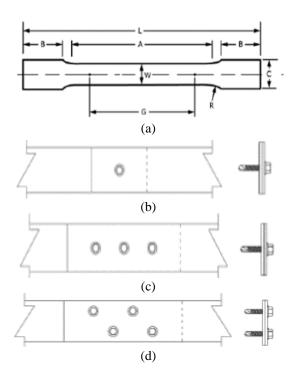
Configuration and assembly of test specimen; (a) without connection, (b) 1 screw, (c) 3 screws, and (d) 4 screws.
